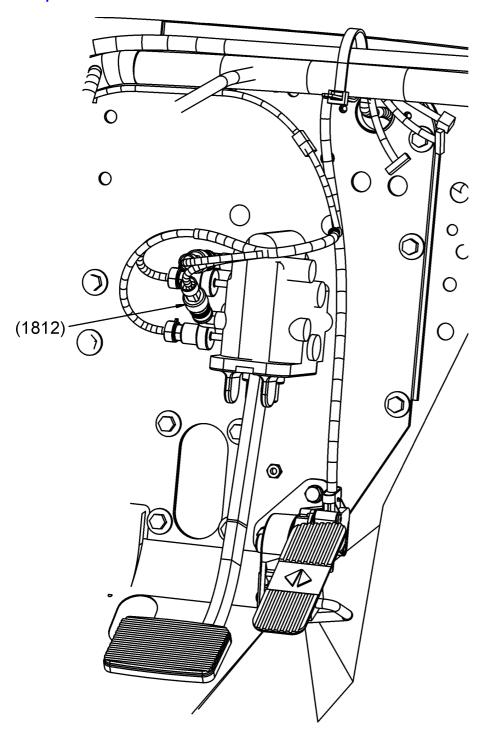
Secondary Air Pressure Gauge Transducer Location (Steering Column Support View)
